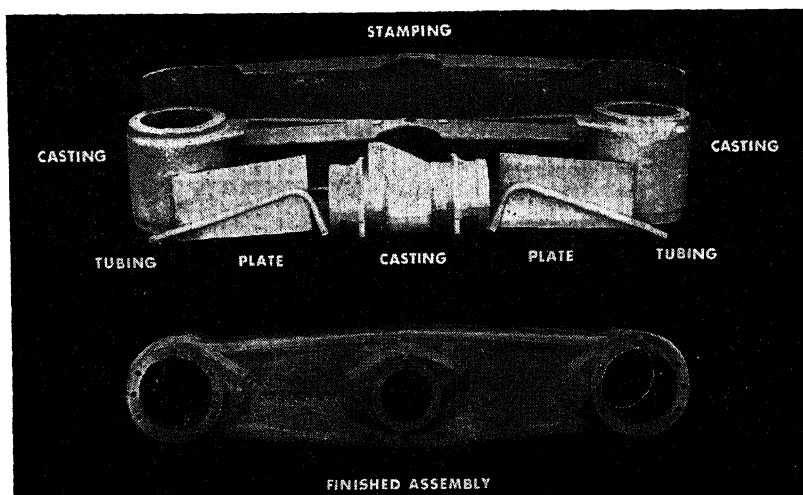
Component parts and finished assembly for a rocker beam used on an earth-moving buggy. This illustrates the engineering freedom of welded design permitting the use of a wide variety of steel shapes for maximum manufacturing and service economy.
